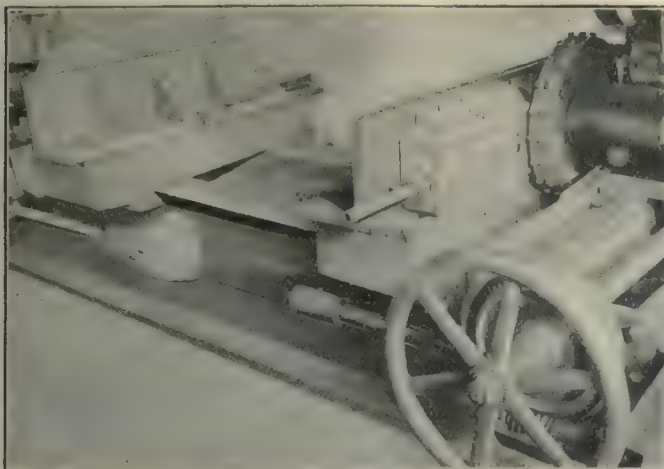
MILLING UPPER SIDE OF CYLINDER HEAD
